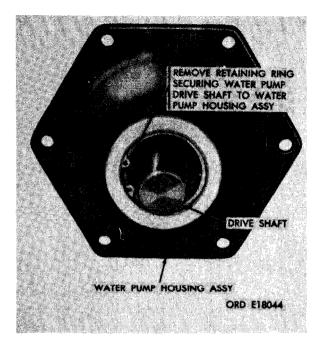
REMOVING OR INSTALLING WATER PUMP DRIVE SHAFT FROM WATER PUMP HOUSING ASSEMBLY.
